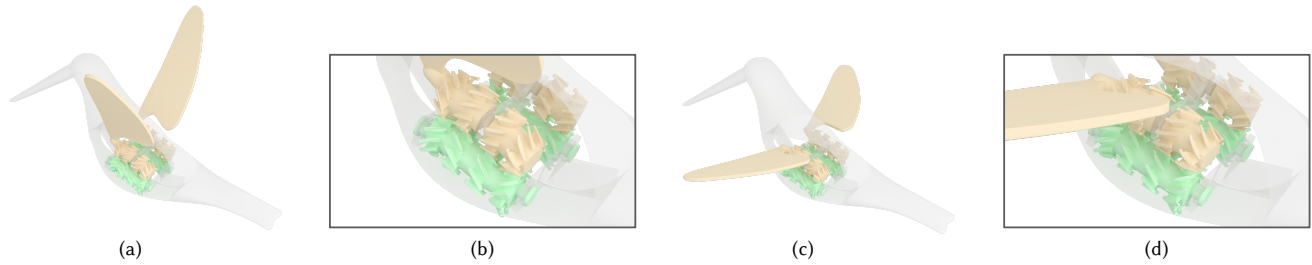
A flapping wing mechanism modeled using mpcGears to perform bird-like flapping motions. (a) and (c) show two key poses of the mechanism, while (b) and (d) provide corresponding close-up views highlighting the details of the mpcGears.
